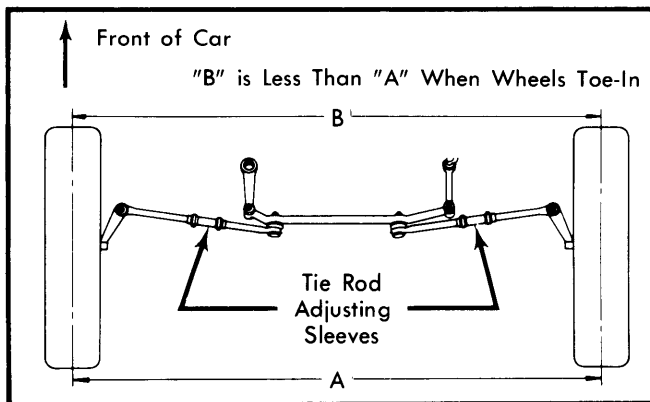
Adjusting Tie Rod Sleeves (Top View)
